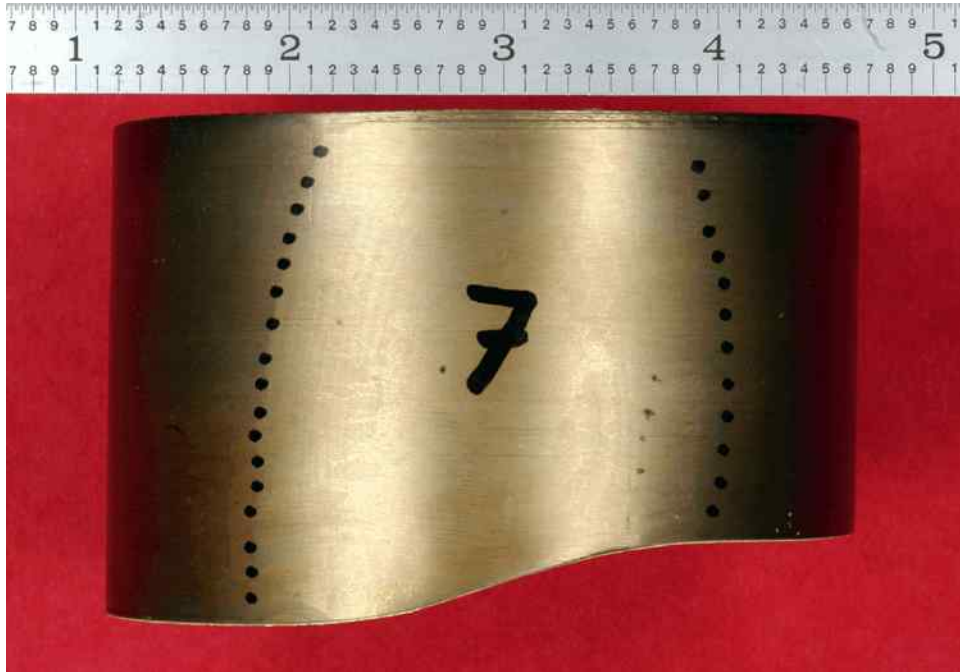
(D71147-05) Core No. 7 (weld metal)
